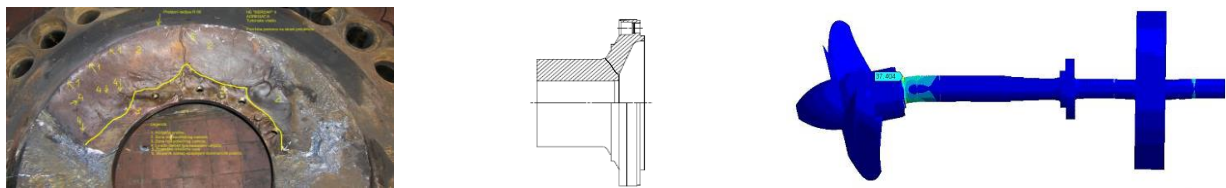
Appearance of the fracture of the horizontal Kaplan turbine shaft, nominal power 28 MW
